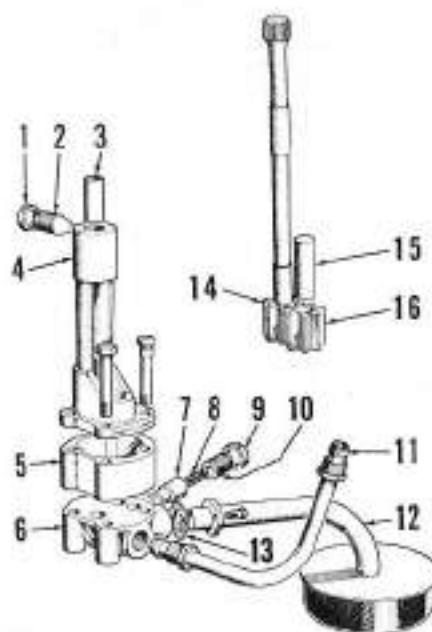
Exploded view of oil pump for three-cylinder diesel engine. Drive shaft has 14-inch hole in top end to carry fuel injection pump drive shaft thrust spring.
